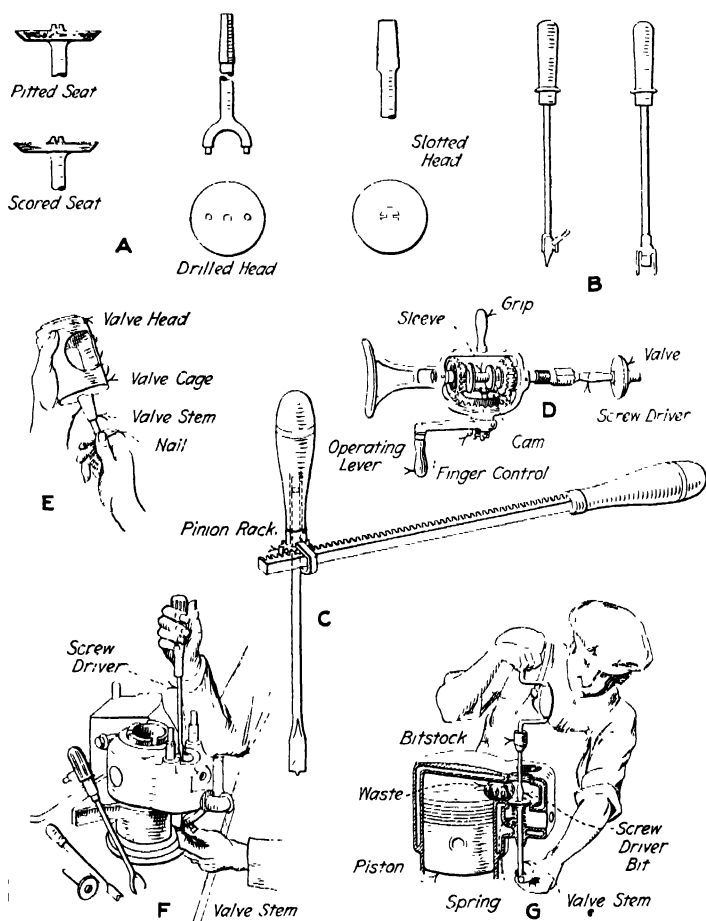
Tools and Processes Used in Auto Engine Valve Grinding May Offer Suggestions to Aero Engine Repairmen.
